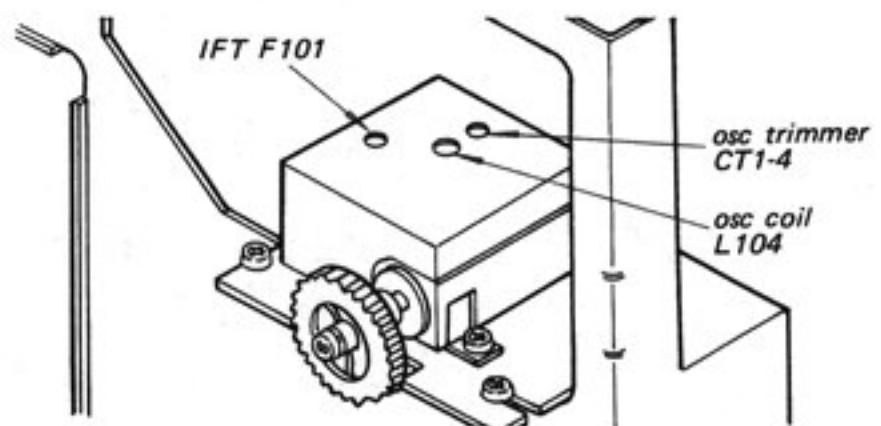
Fm tuner block adjustments on fm tuner block
